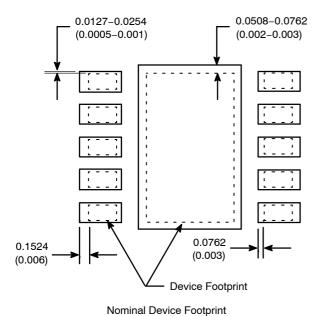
10 Pin DFN Package Footprint Shown with PCB Mounting Pads
